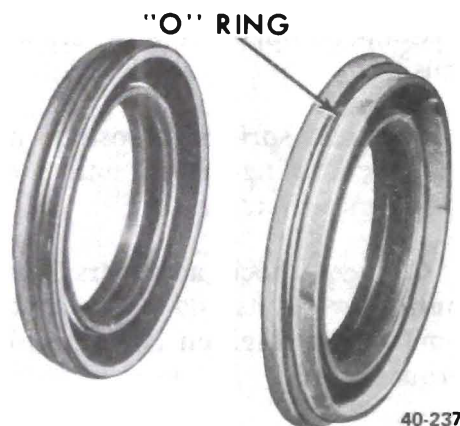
1970 43-44000 Axle Shaft Seals
